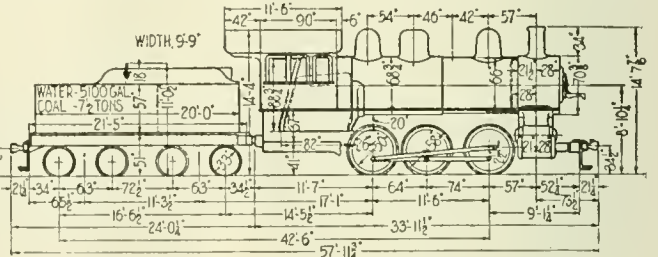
SIX-WHEEL SWITCHER, STRAIGHT TENDER.
